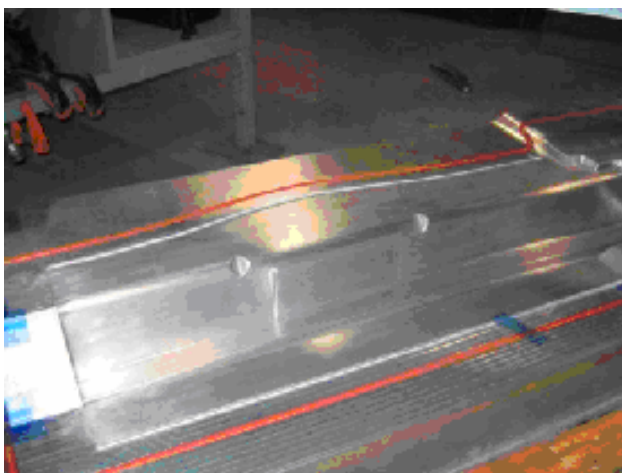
Open view of Aluminum based RTM “Pre-PV” tool for sections 3&4
